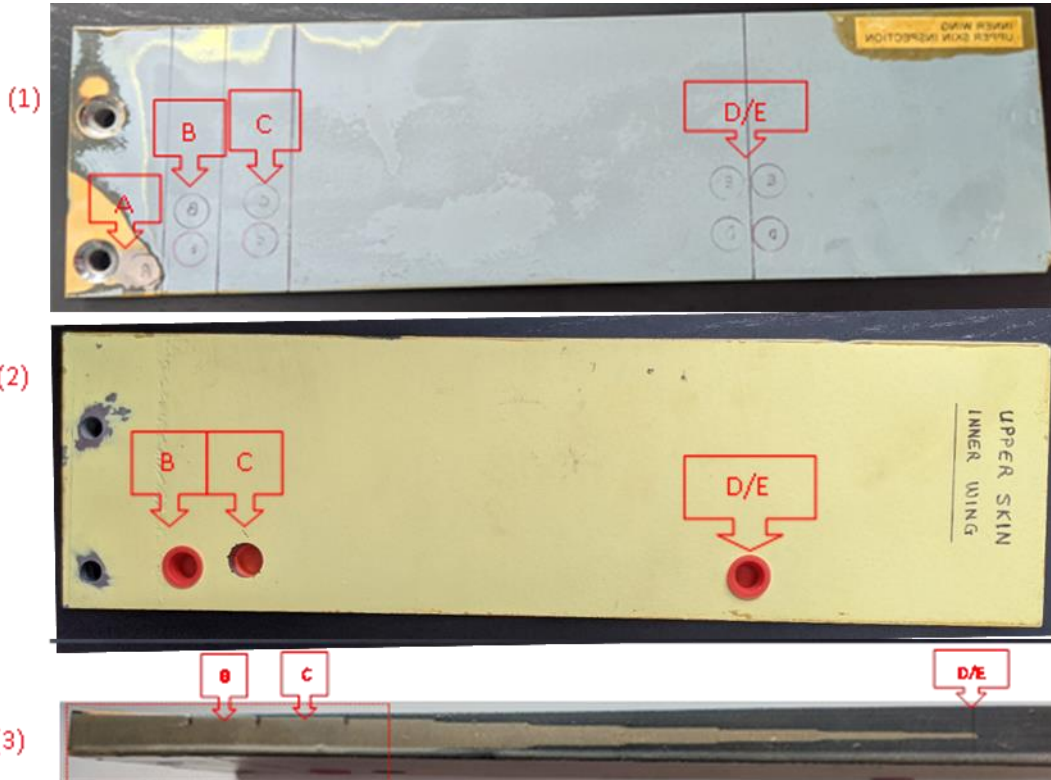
IWSLJ calibration block (1) top view (2) bottom view (3) side view with inspection points (A) titanium (B) Step 1 (C) Step 2 (D/E) Step 9.
